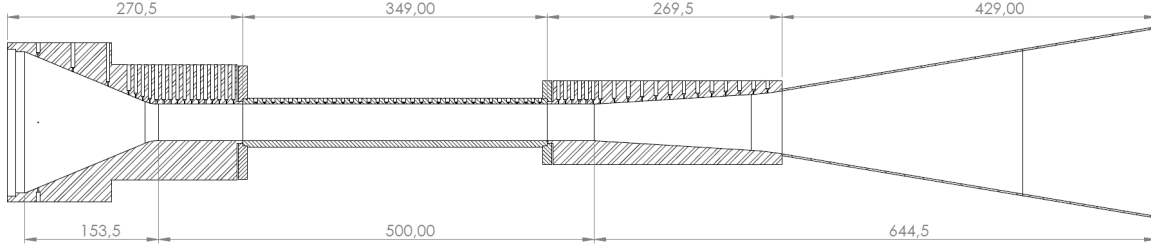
Technical drawing of the ejector assembly, from [22]. The length of the physical parts are displayed above, while the length of the functional parts are displayed below. The dimensions are in millimeters.
